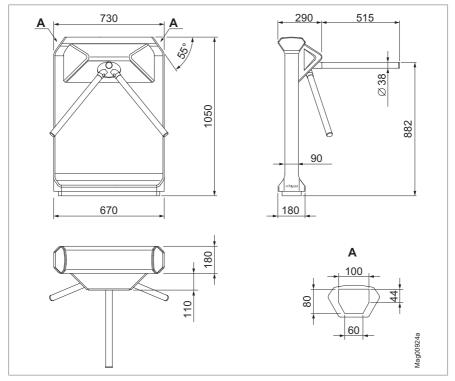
Dimensions FMTP-MS (dimensions in mm)
